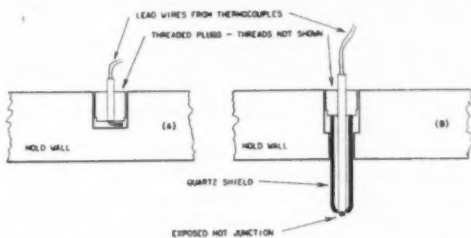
Schematic drawing shows method of installing thermocouples in the mold wall and the mold interior.
